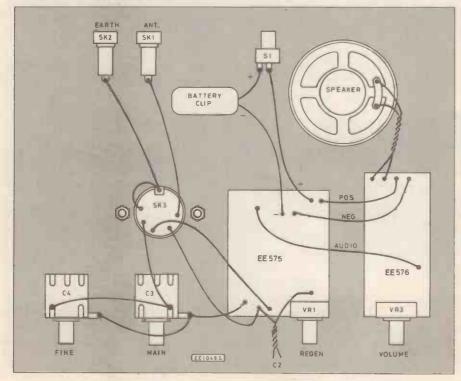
Interwiring details for the off-board components. Note pin 4 of coll L1 is "earthed" through socket SK3 chassis tag.
